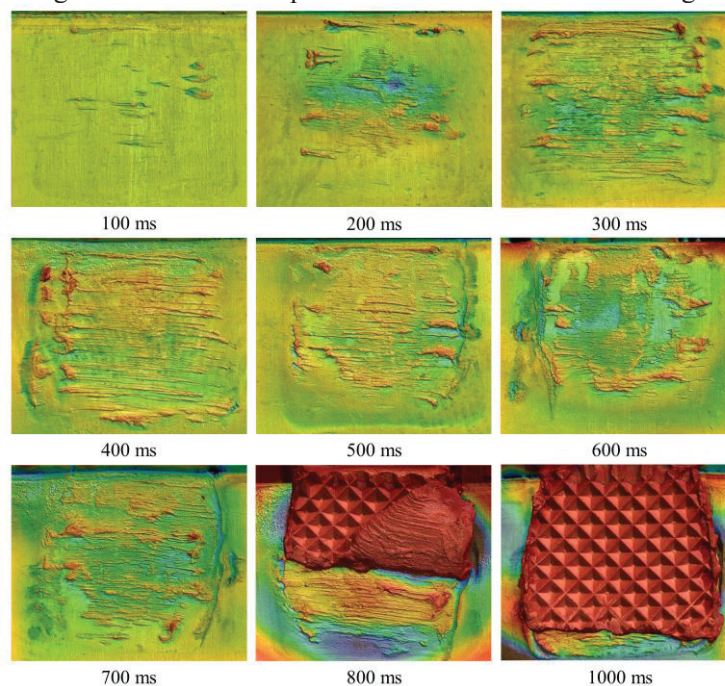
Fracture surfaces measured with laser confocal microscope for different welding times
